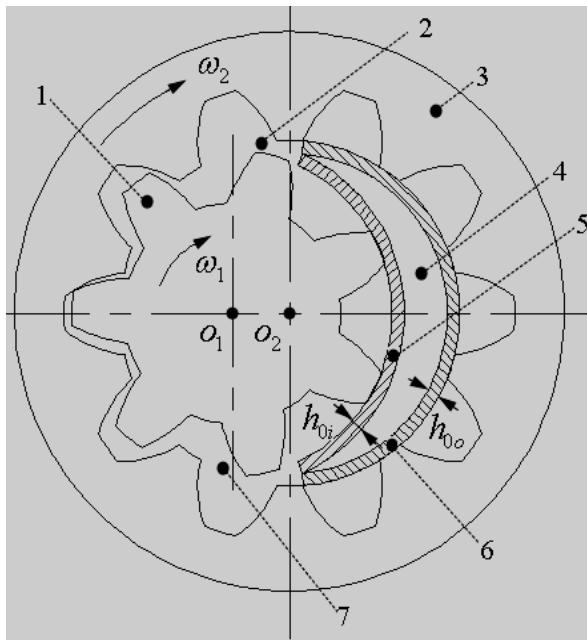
Oil film gaps between the internal gear pump and external side and internal side of the crescent board (Note: 1 indicates internal gear (driving gear); 2 indicates the oil suction cavity; 3 indicates external gear (driven gear); 4 indicates the crescent board; 5 indicates the inside gap of the crescent board; sign 6 indicates the internal gap of crescent board; 7 indicates the pressure oil cavity; signs o_1 and o_2 indicate the circle centers of the internal gear and the external gear; ω_1 and ω_2 indicate the rotation angular velocities: rad/s of the internal gear and the external gear; h_{0i} indicates the radial distance m between the inside surface of crescent board and surface of the addendum circle of the internal gear; h_{0o} m indicates the radial distance between the external surface of crescent board and the surface of the addendum circle of external gear, similarly hereinafter.)
